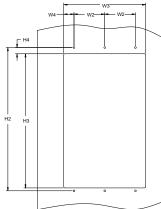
Flange mounting diagram for 660V 160–220kW models
